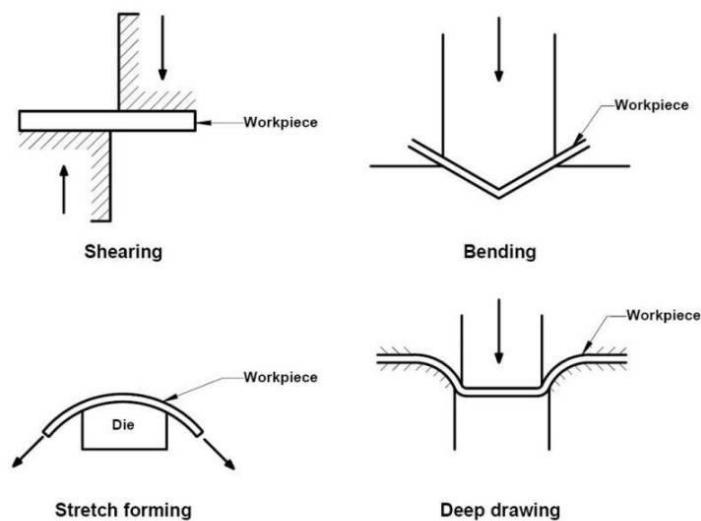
Schematic of a few sheet metal working operations [<https://www.enggwave.com/sheet-metal-forming>]
